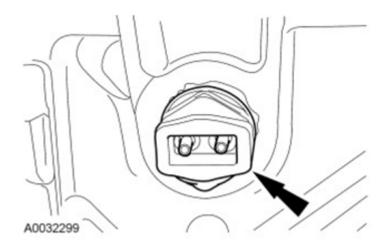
Locating Block Heater Courtesy of FORD MOTOR CO.
